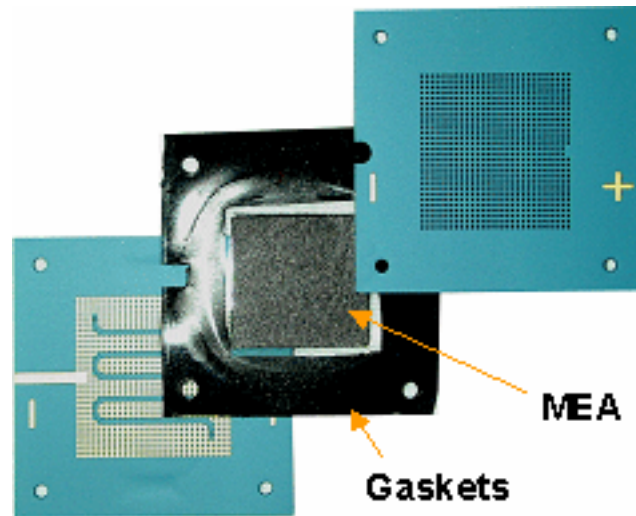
(b): Exploded view of DMFC highlighting gasket and MEA
